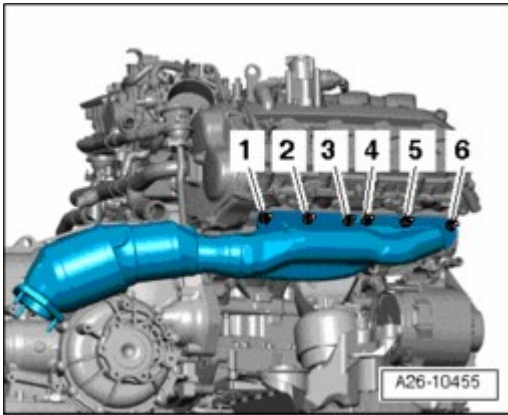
Turbocharger, Removing And Installing: Assembly Overview
